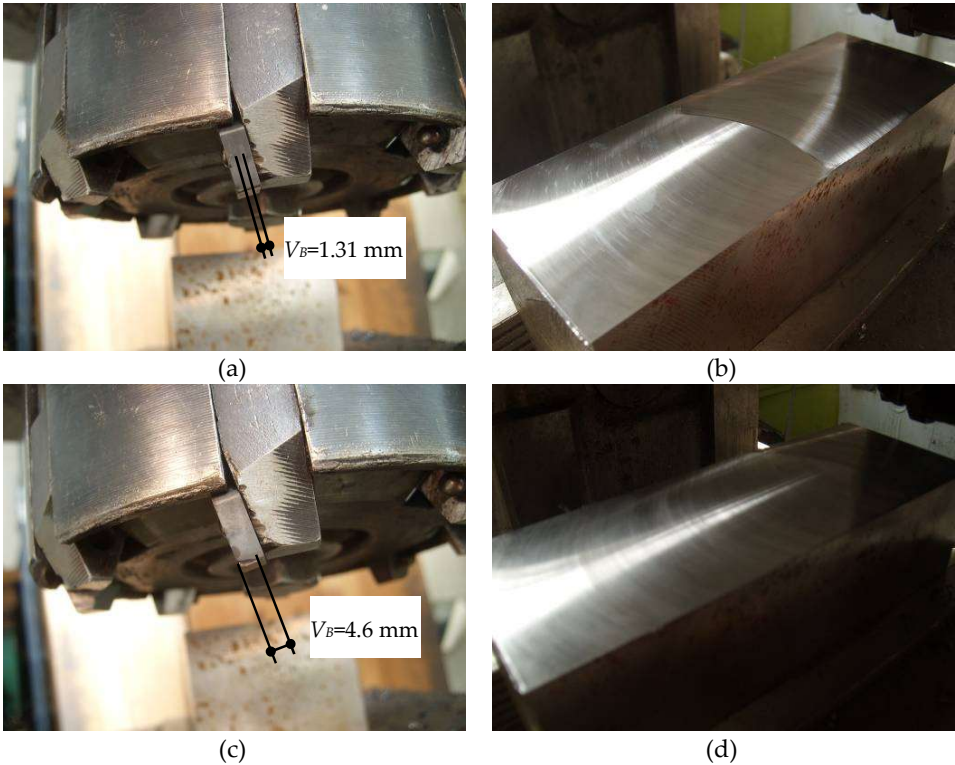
Left: flank wear of the mill tooth; right: machined surface of the workpieces at the milling depth $a_p = 1.0 \text{ mm}$; feed $f_z = 0.125 \text{ mm/tooth}$; cutting speed $v_c = 392.6 \text{ mm/min}$; Spindle rotation speed of the mill $n = 1.000 \text{ rpm}$: (a) Face milling cutter (First pass $V_B = 1.31 \text{ mm}$); (b) Machined part (First pass $V_B = 1.31 \text{ mm}$); (c) Face milling cutter (Second pass $V_B = 4.6 \text{ mm}$); (d) Machined part (Second pass $V_B = 4.6 \text{ mm}$).
